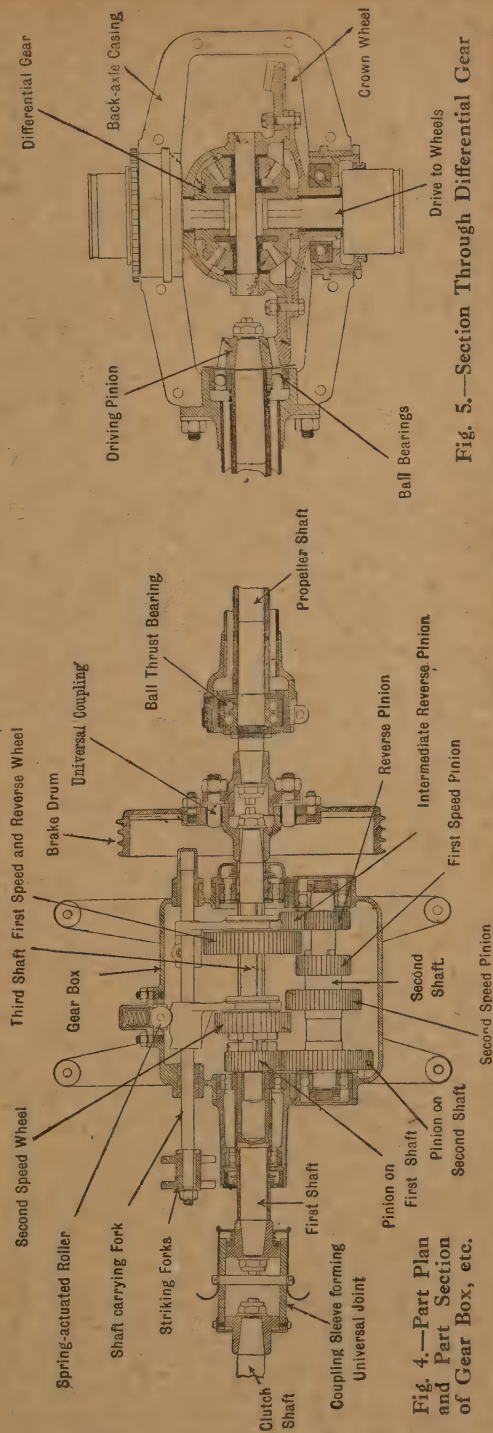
Part Plan and Part Section of Gear Box, etc.
